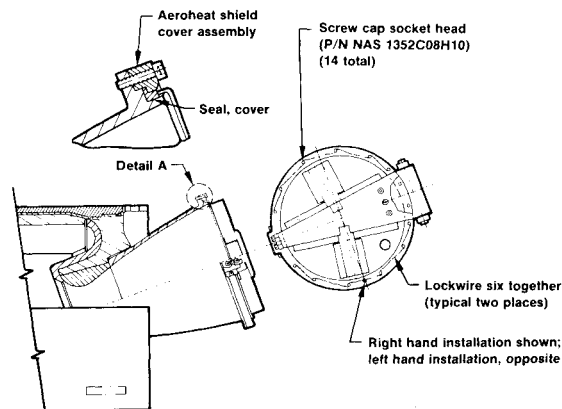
Aeroheating shield assembled to BSM exit cone.
